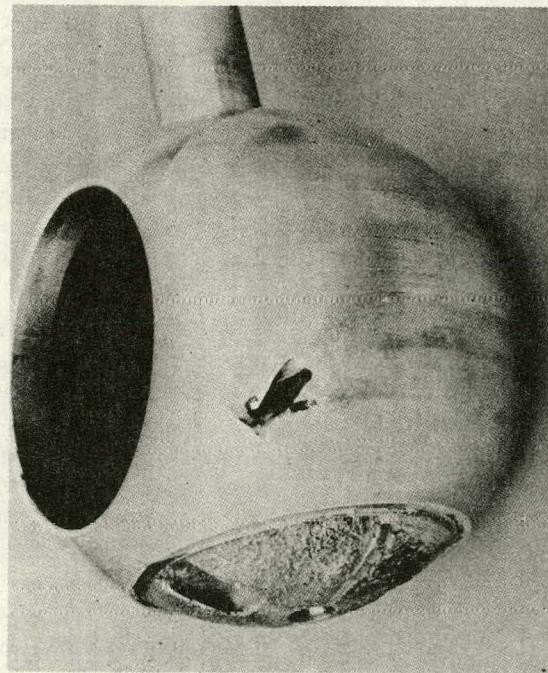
Erosion Damage to the Mating Ball of the Equipment Shown in Figure 16-2
